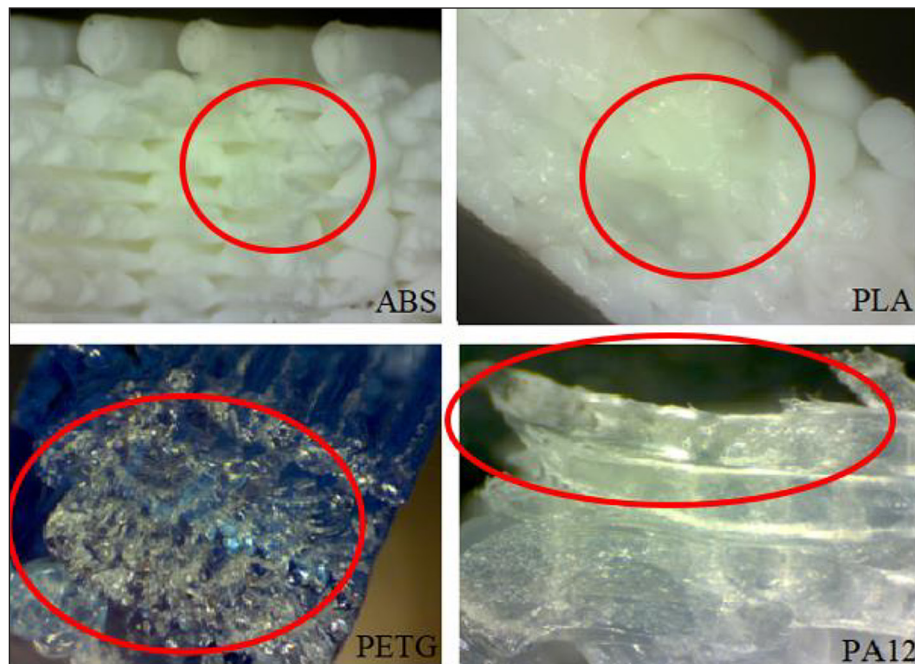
Microscopic imaging of pure polymer samples (after tensile test – fracture surface)
